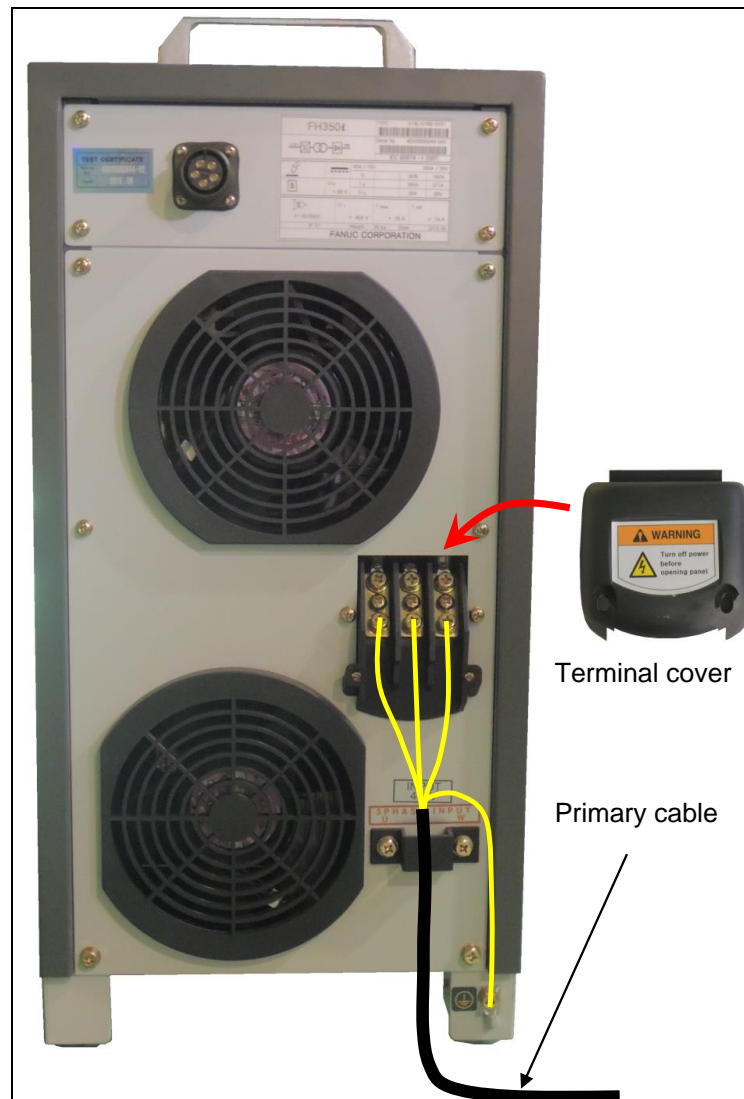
(a) Connection of Welding power supply FH350i
